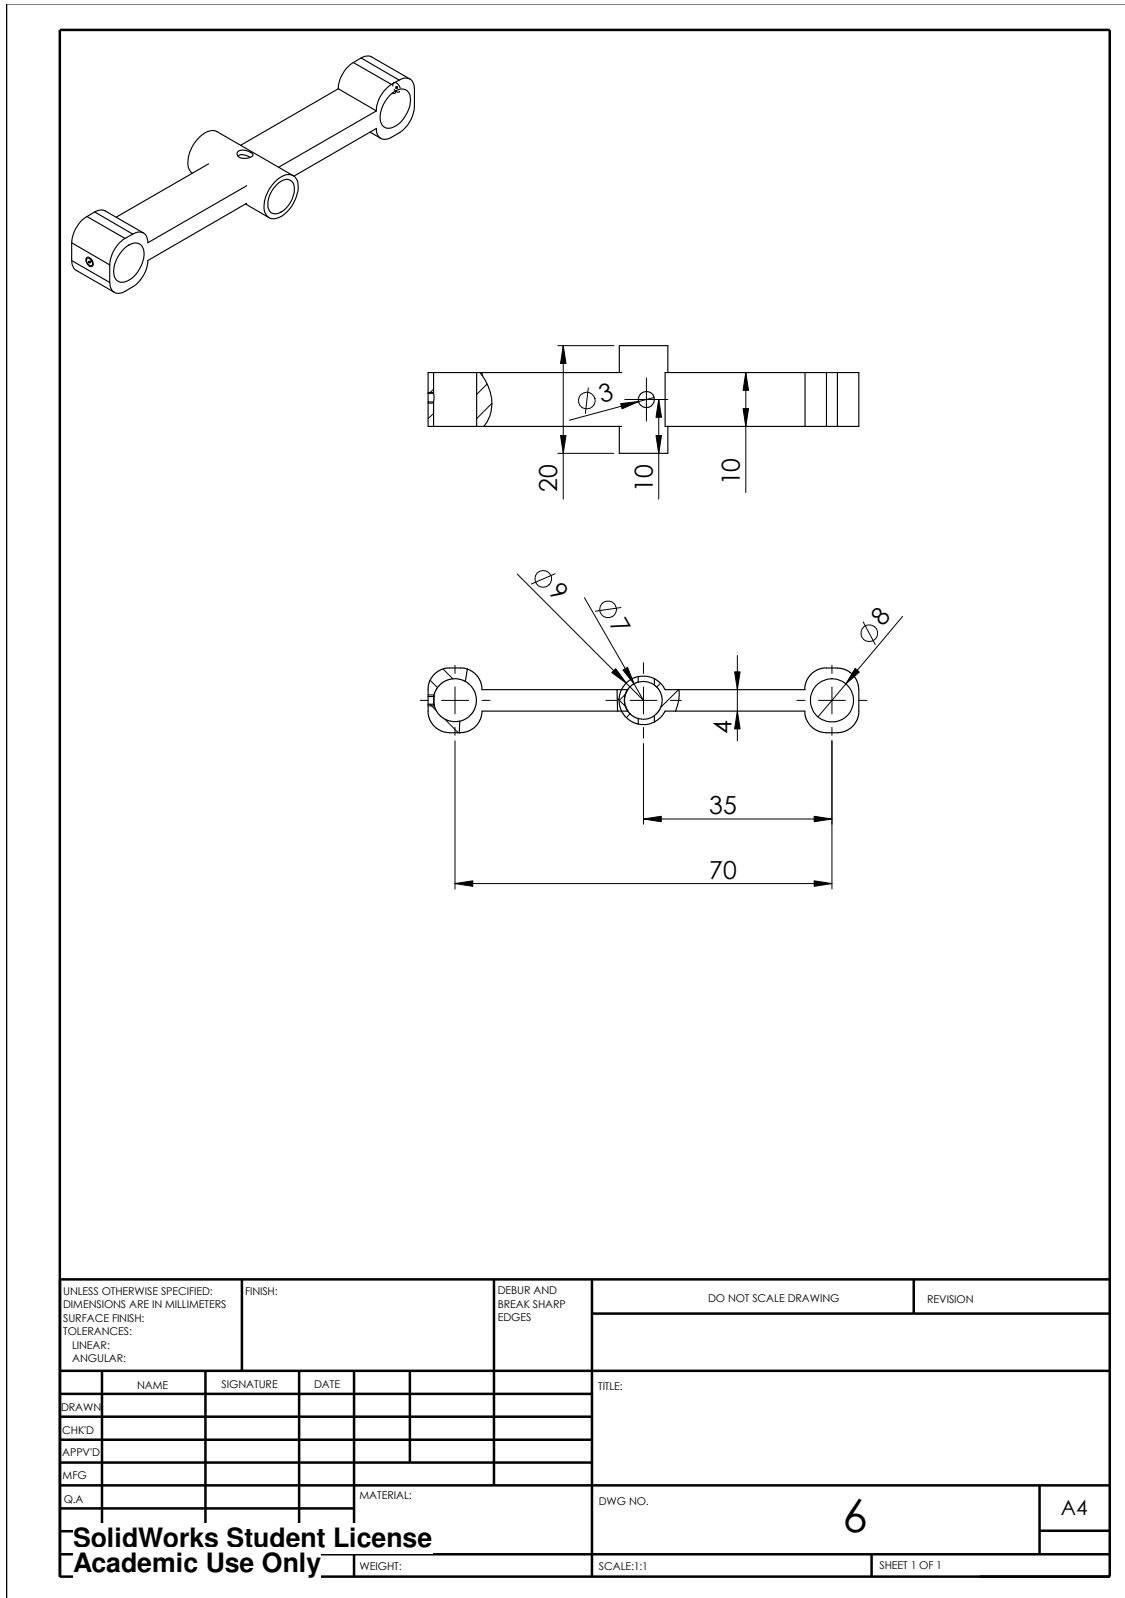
Technical drawing of the part that supports the conic mirror.
